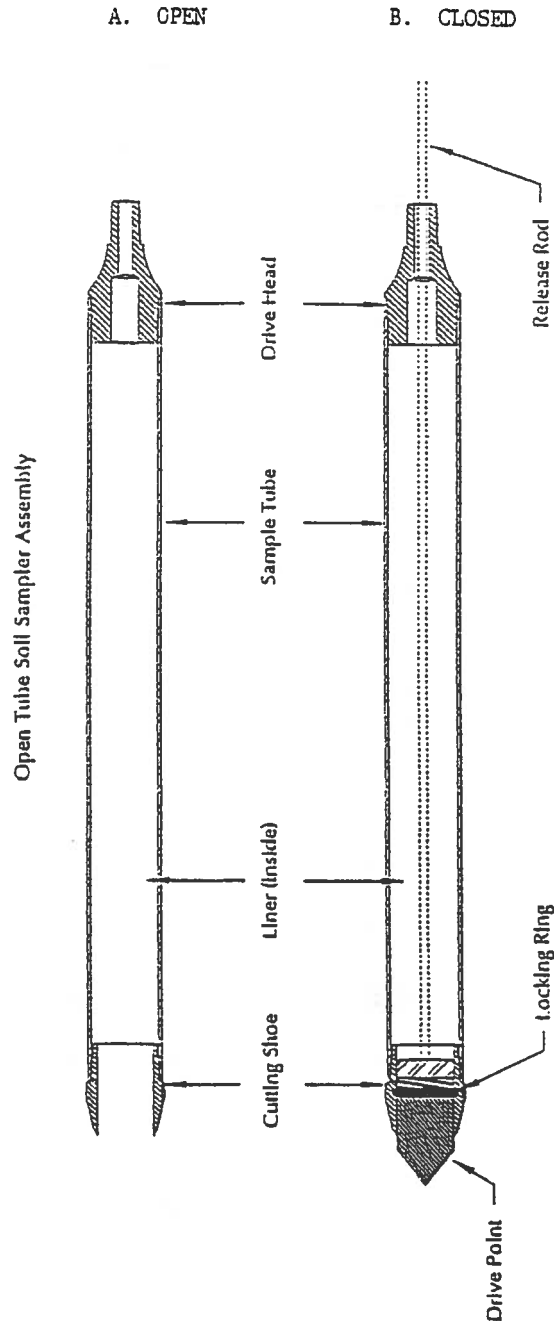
(A) Open and (B) Closed Piston Sampler Assembly, Single Tube System
